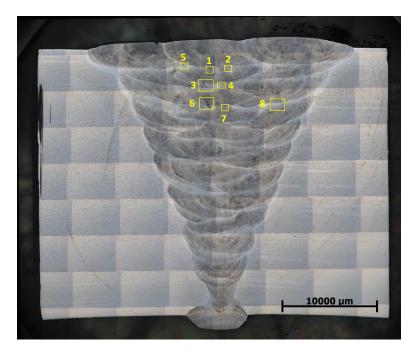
Cross-weld view of the W4 weld. Sub-mm weld cracks were found near the top section of the weld.
